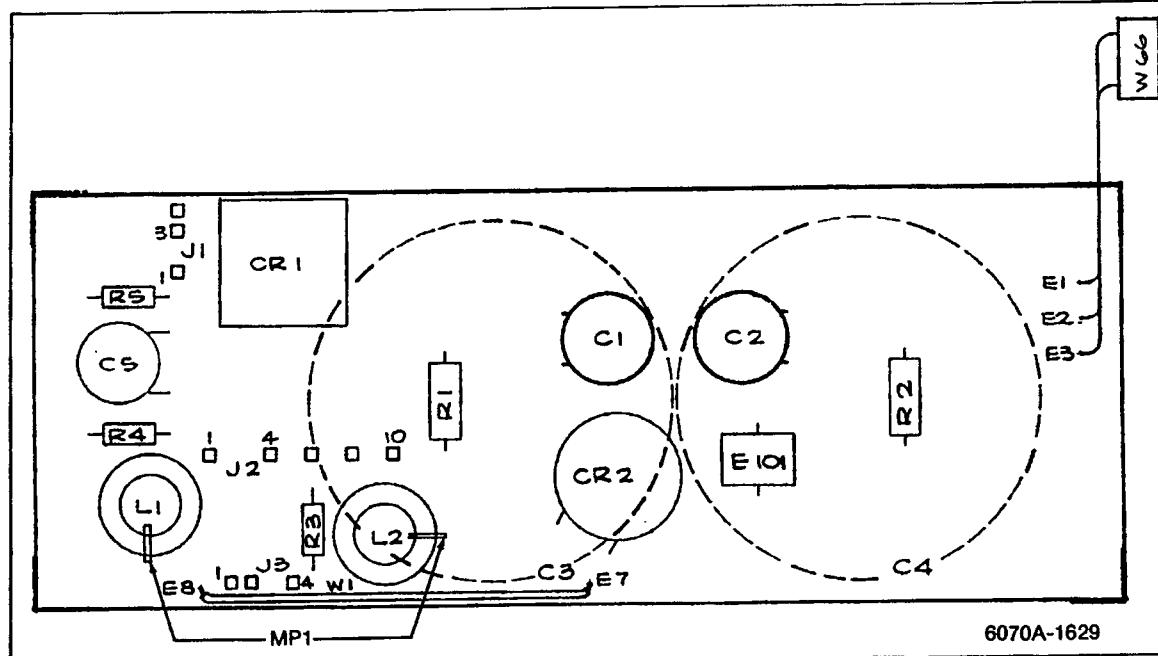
A5A4 Input Rectifier PCB Assembly
